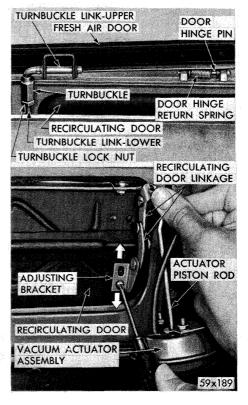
Adjusting Fresh Air and Recirculating Door
